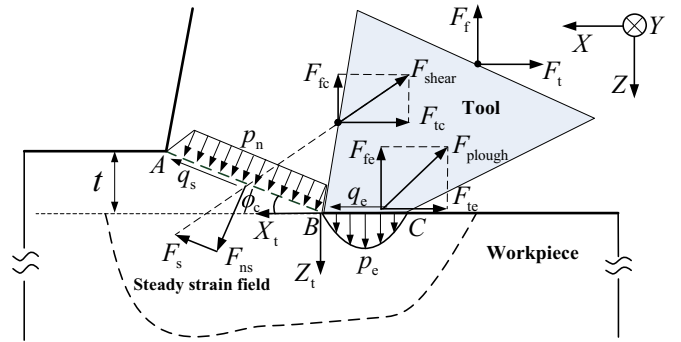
Mechanical loading with flank wear in orthogonal machining.
